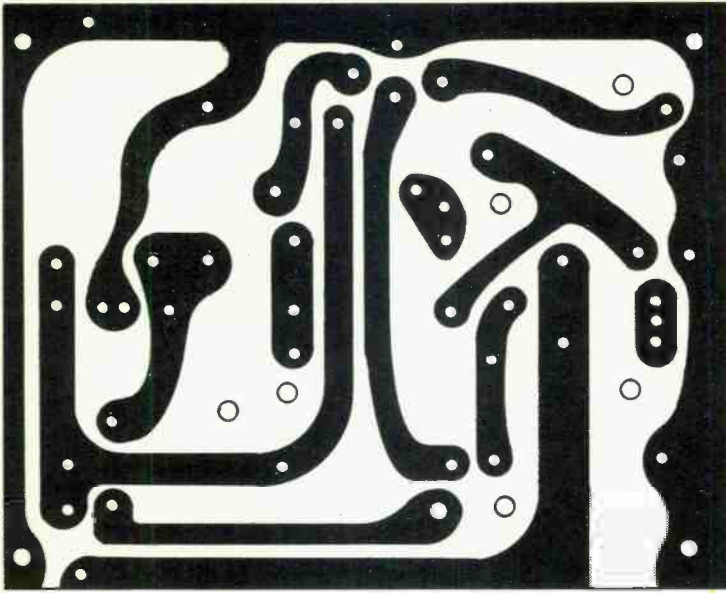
If you decide to make your own printed circuit board, use this full-size drawing as a guide to proper etching of foil side of board.
